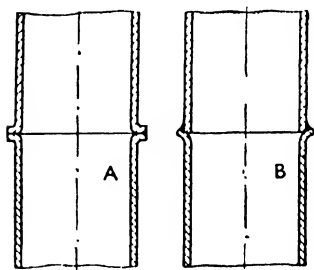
Vertical welds in thin-walled copper tubes.
